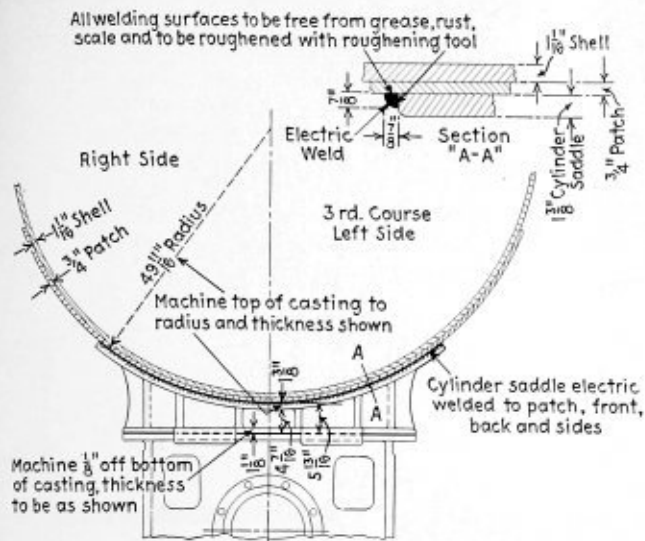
Welded saddle liner on simple Mallet locomotive boiler
